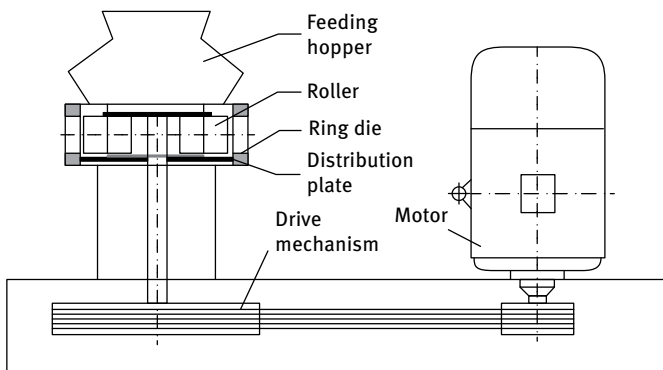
Structural diagram of vertical ring die pellet fuel briquetting machine.
